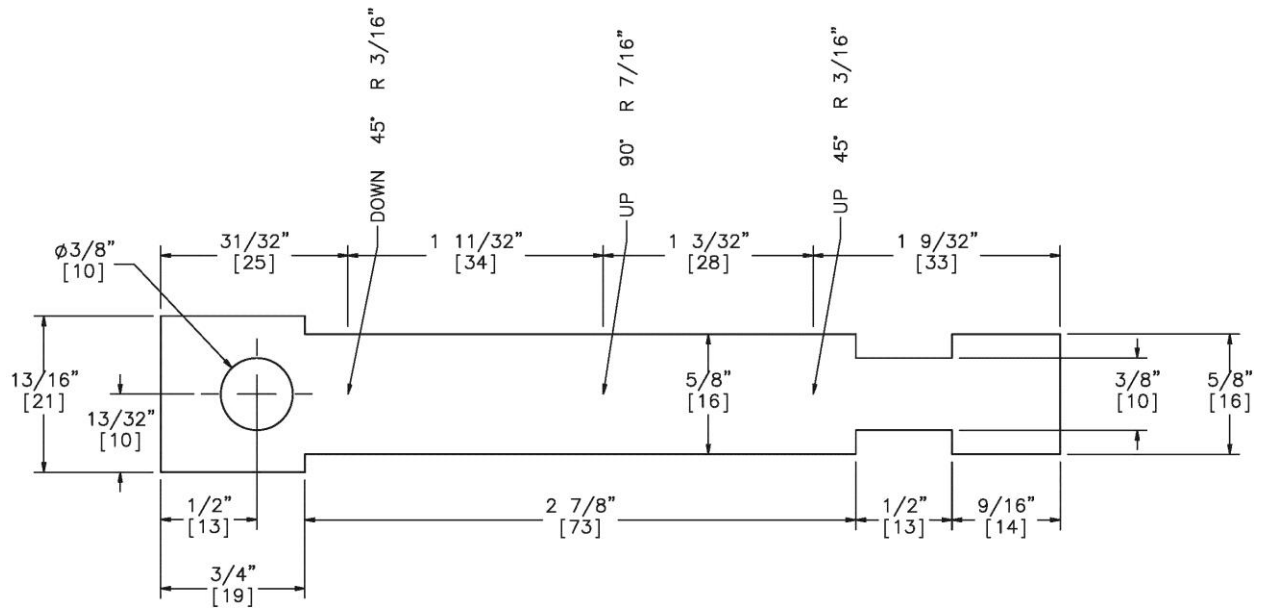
Flat Pattern of Tabbed Bracket Version 3
